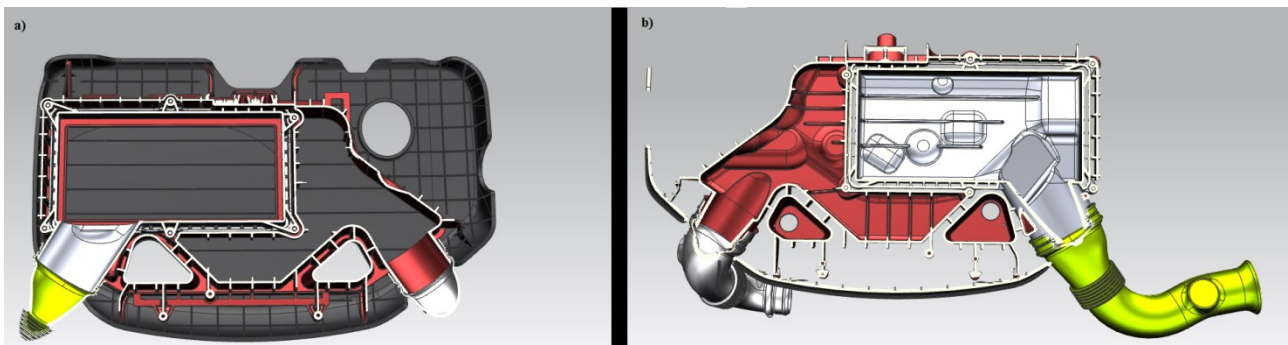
Detailed view of the structural CAD model of the studied system: a) down and b) top.
